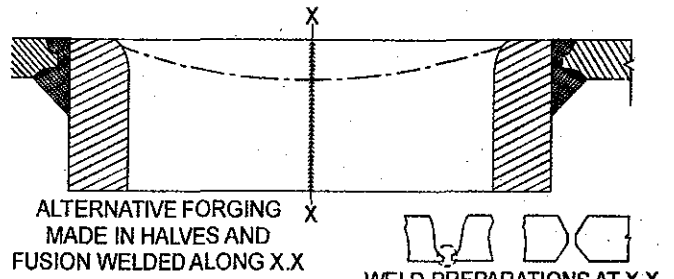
FUSION WELDED OVAL MANHOLE FRAME
